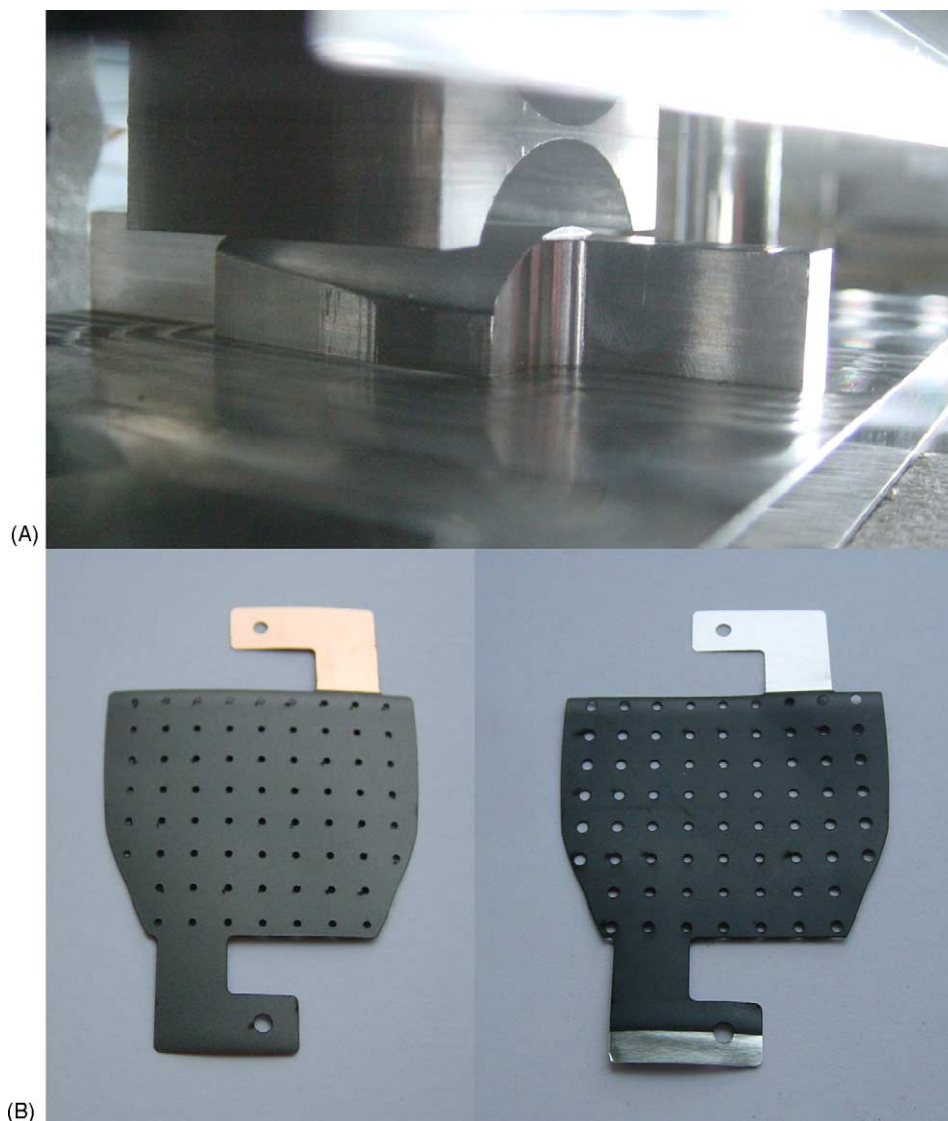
Upper and lower parts of the preshaped riveting tools (A) and examples of flat and preshaped, laser-cut electrodes, clearly revealing the pattern of the 1 mm holes (B).
